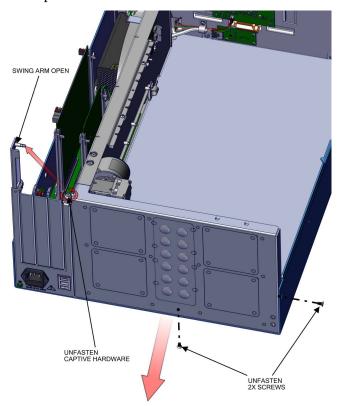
Unfasten Hardware Rear for Measurement Side Removal
